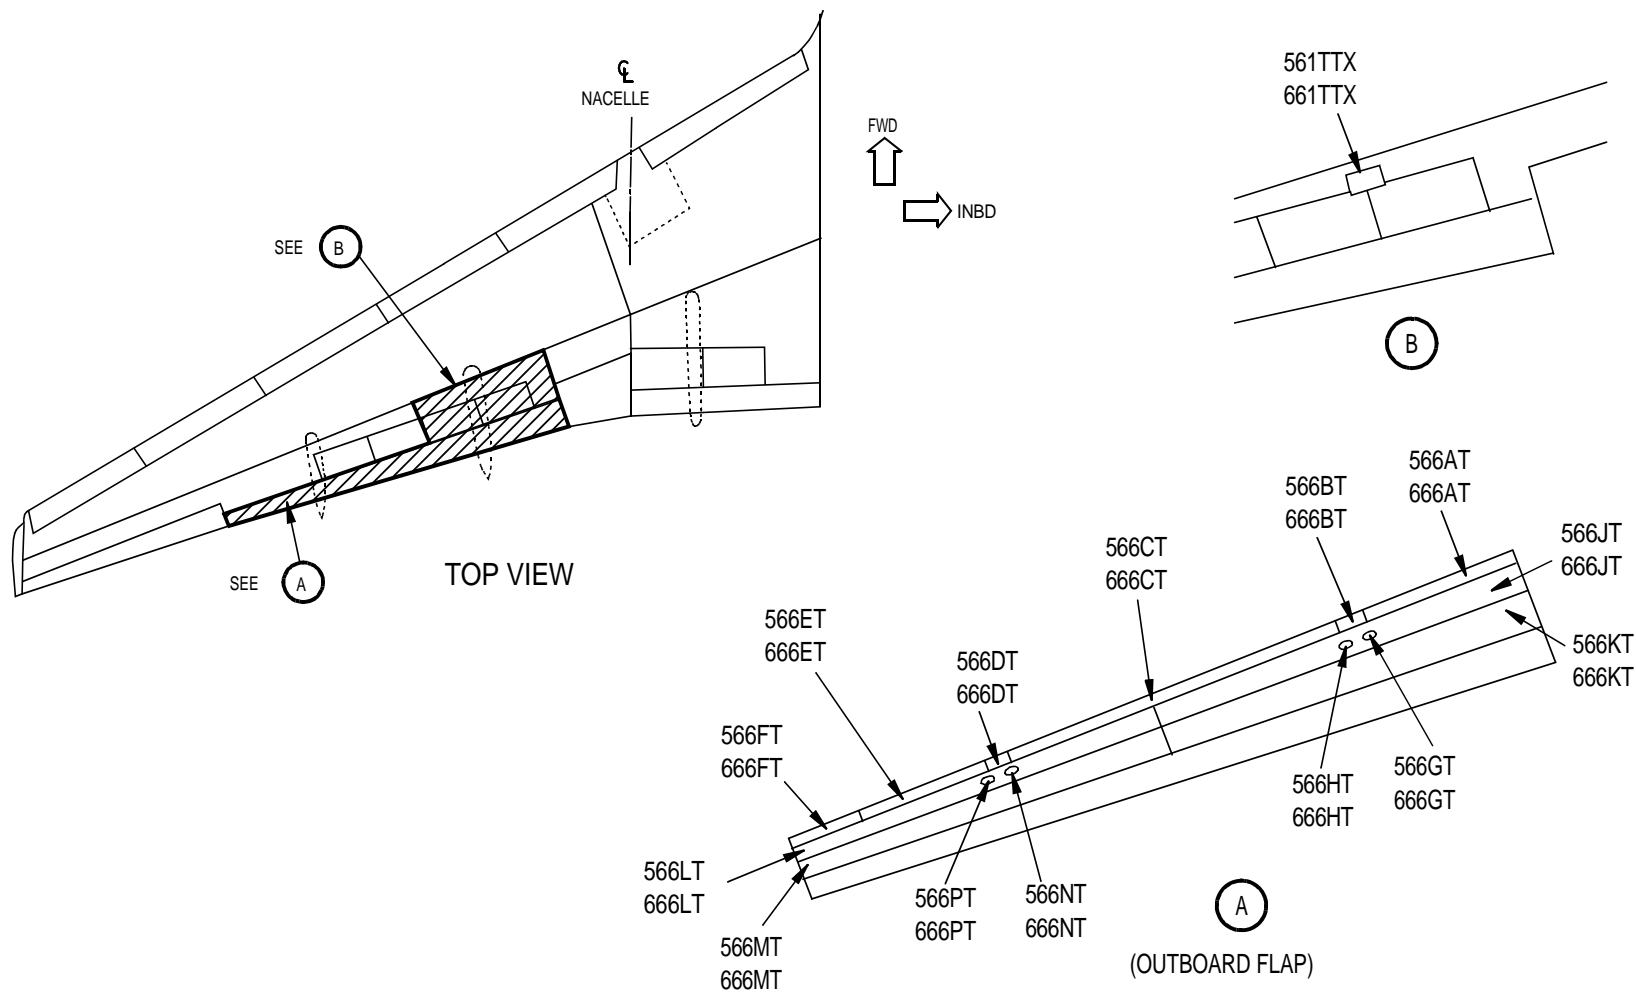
SUB-MAJOR ZONES 561/661, 566/666 - OUTBOARD WING TRAILING EDGE (LEFT WING SHOWN, RIGHT WING TYPICAL)
